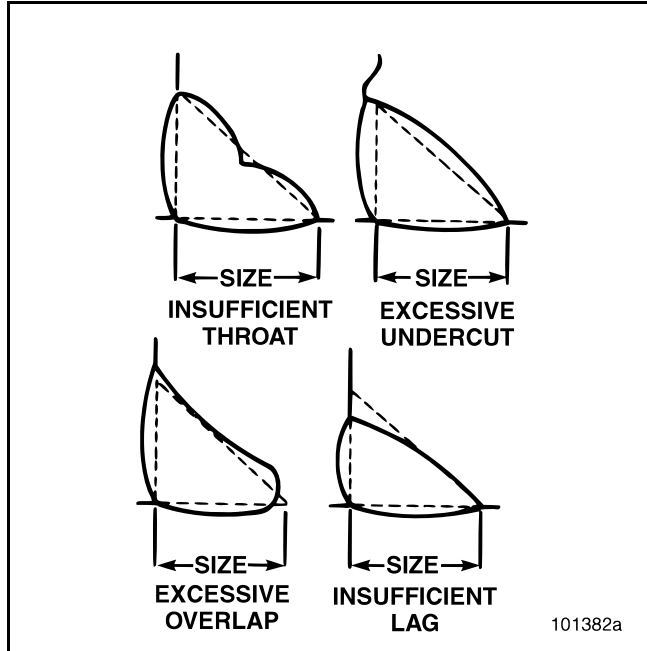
Unacceptable Fillet Weld Profiles
